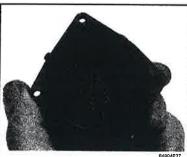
Inspect the inside of the float bowl for dirt and debris. Also check the condition of the rubber O-ring
